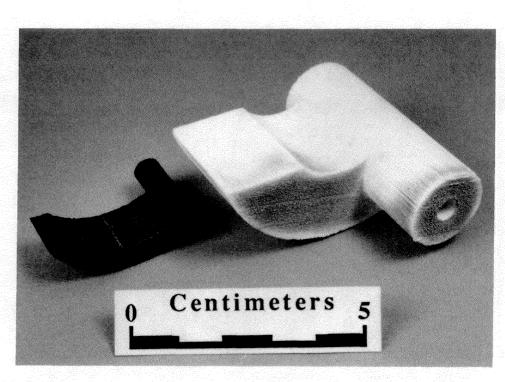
The part on the right is a complete shell with integral core. The metal would be poured into the lower front. The part on the left is a hollow casting (see detail below) which was poured into a shell like the one shown. The casting is shown in the orientation that it would have in the shell.
